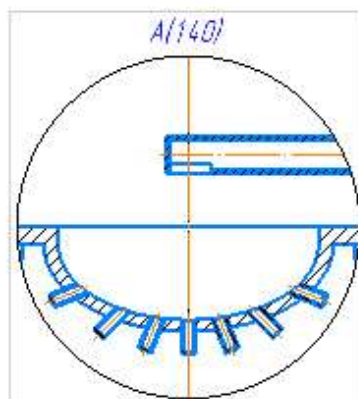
Scheme of the sprayer (detail section A, in Figure 1)
